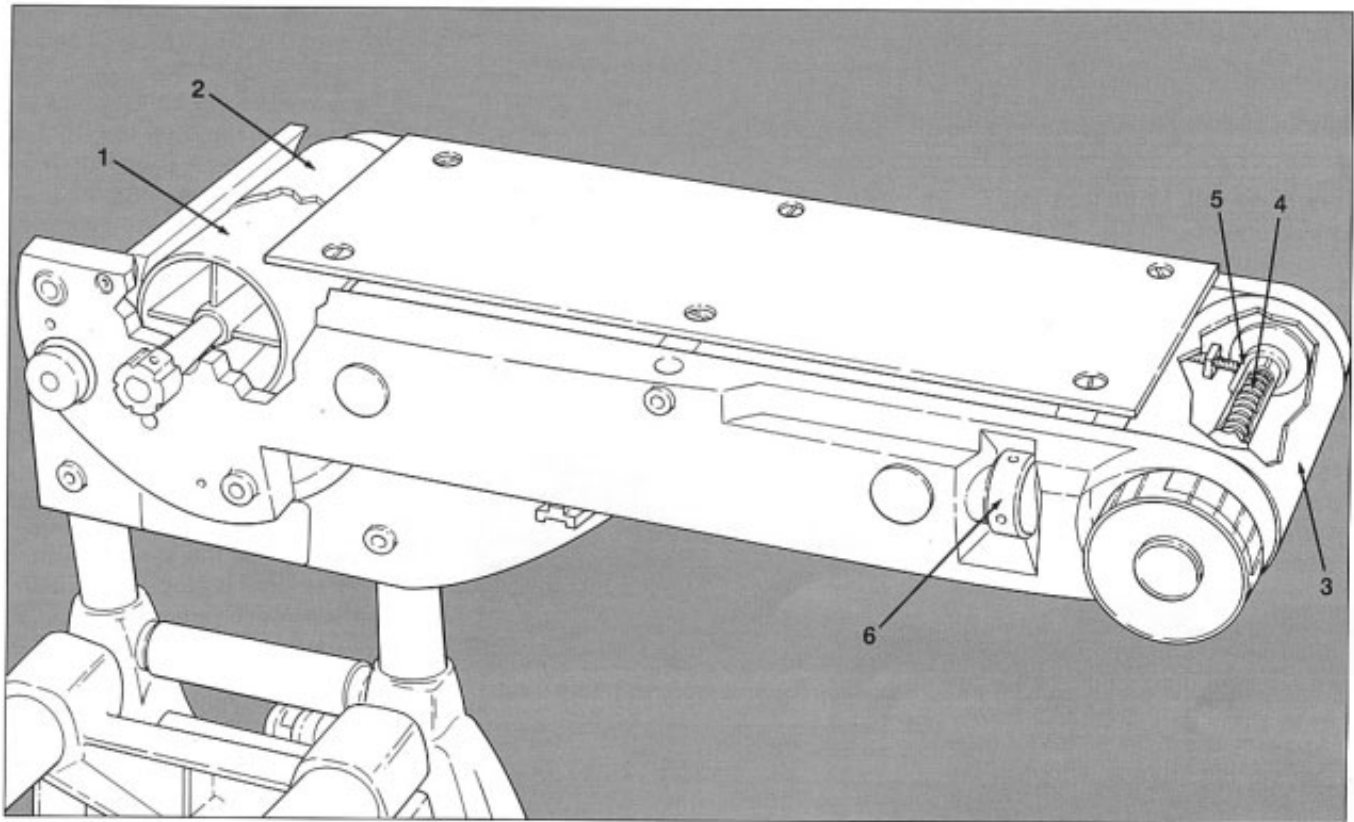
The drive drum (1), at the back of the belt sander, is covered with a rubber sleeve (2) and drives the abrasive belt. The idler drum (3), at the front of the machine, revolves on a hollow shaft. Inside this shaft is a torsion spring (4) that coils against a cam (5). This, in turn, presses the drum forward and tensions the belt. In addition, the tracking knob (6) adjusts the position of the idler drum to center the belt.
